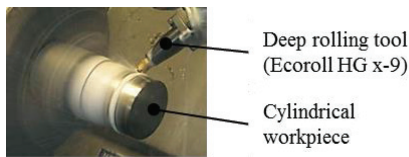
experimental setup for deep rolling of cylindrical workpieces.
